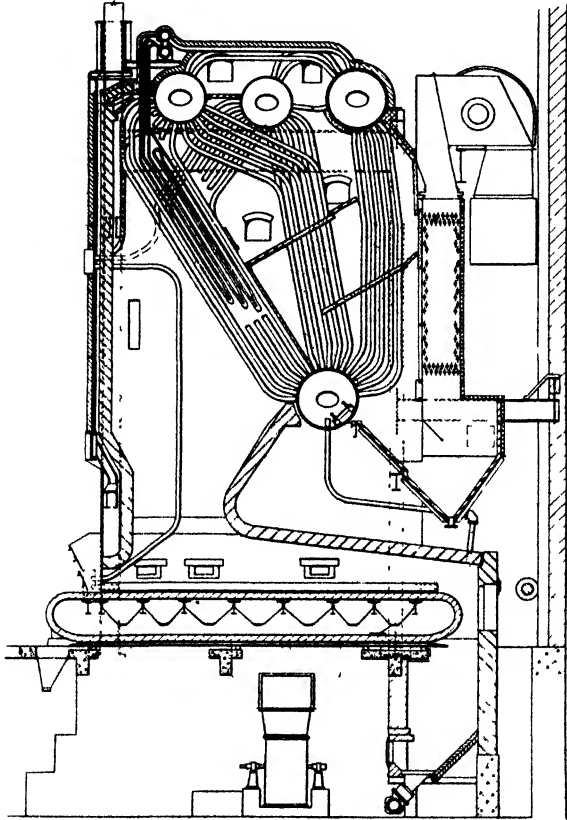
Four-drum boiler with superheater. (*Combustion Engineering Co., Inc.*)
